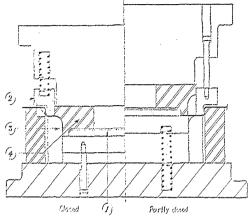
Die for drawing flange around center opening. (General Electric Co.)
